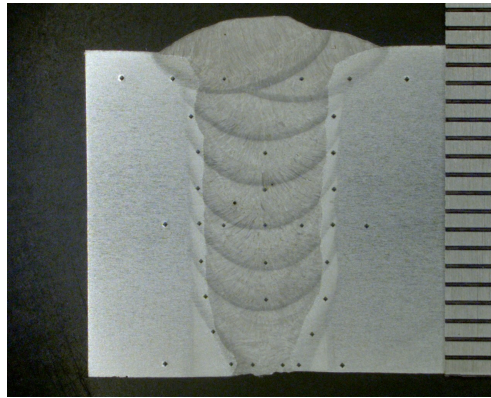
Narrow gap weld used for the modern pipe girth welds
